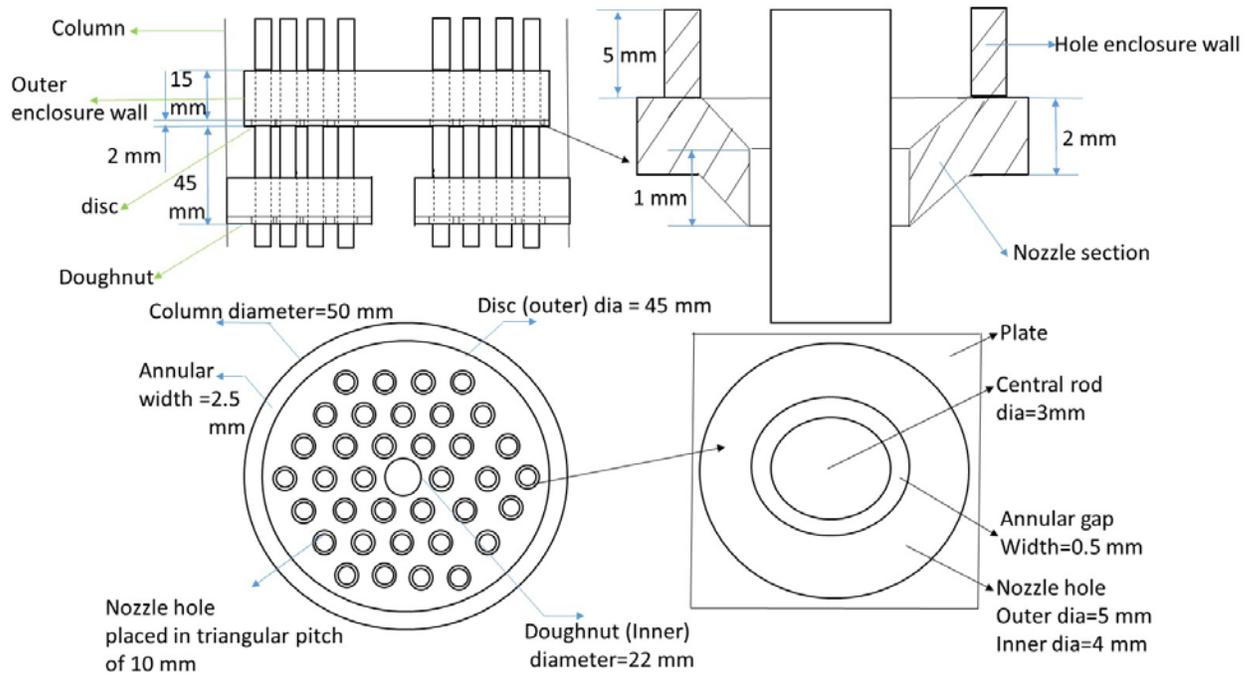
Detailed drawing of the plate spacer arrangement in the gas distributor
